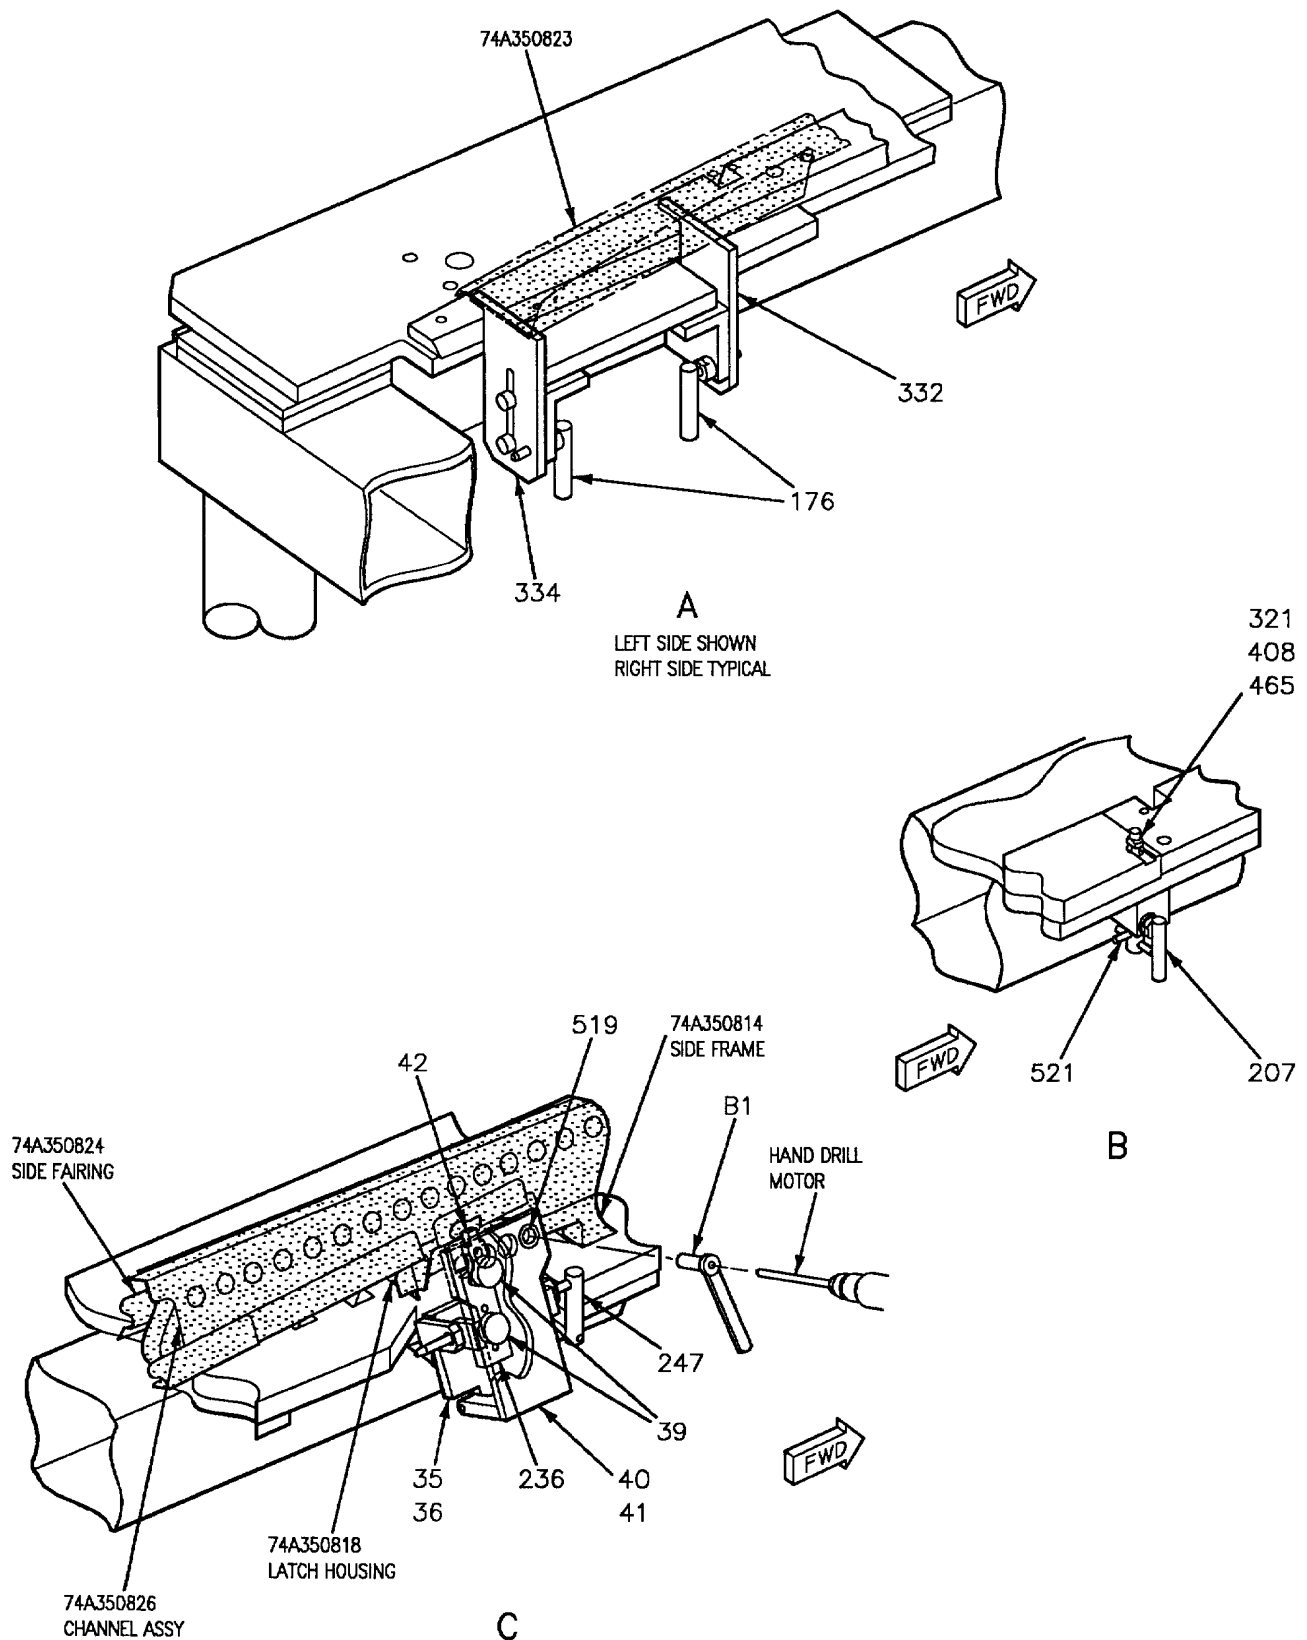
Replacement - Latch No. 2 (Sheet 2)
